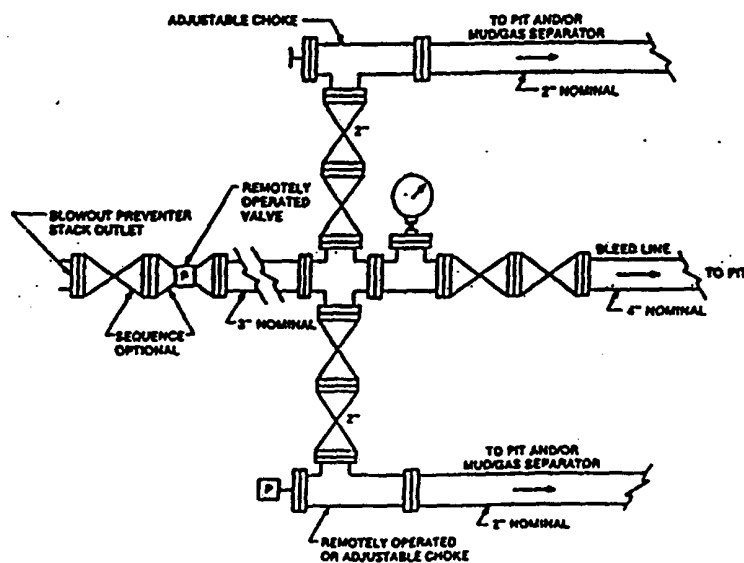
Typical choke manifold assembly for 5M rated working pressure service — surface installation.
